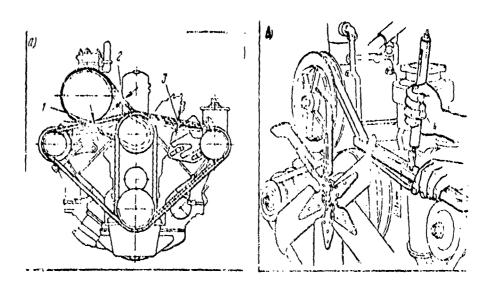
Location diagram and method of checking engine drive belt tightness:
